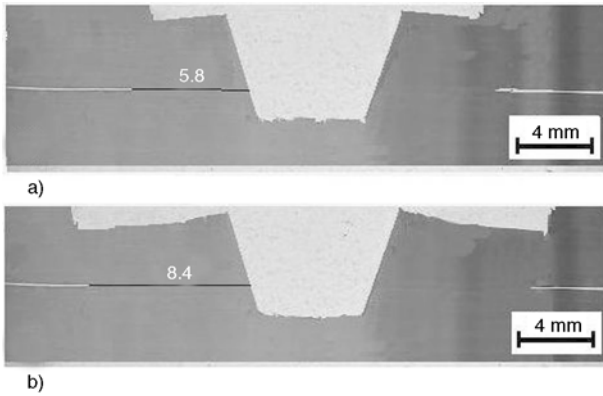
The effect of the shoulder diameter on the weld cross sections. (a) 20 mm shoulder diameter and (b) 30 mm shoulder diameter.
